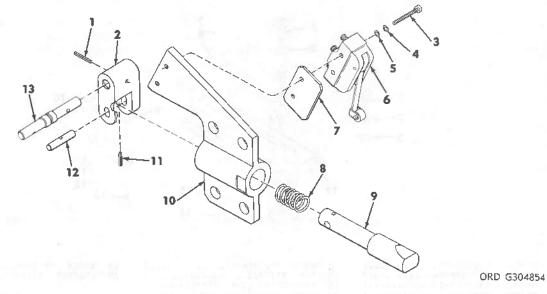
STOP /8515248/-EXPLODED VIEW /SEE FIGURE 169 FOR NEXT HIGHER ASSEMBLY/
